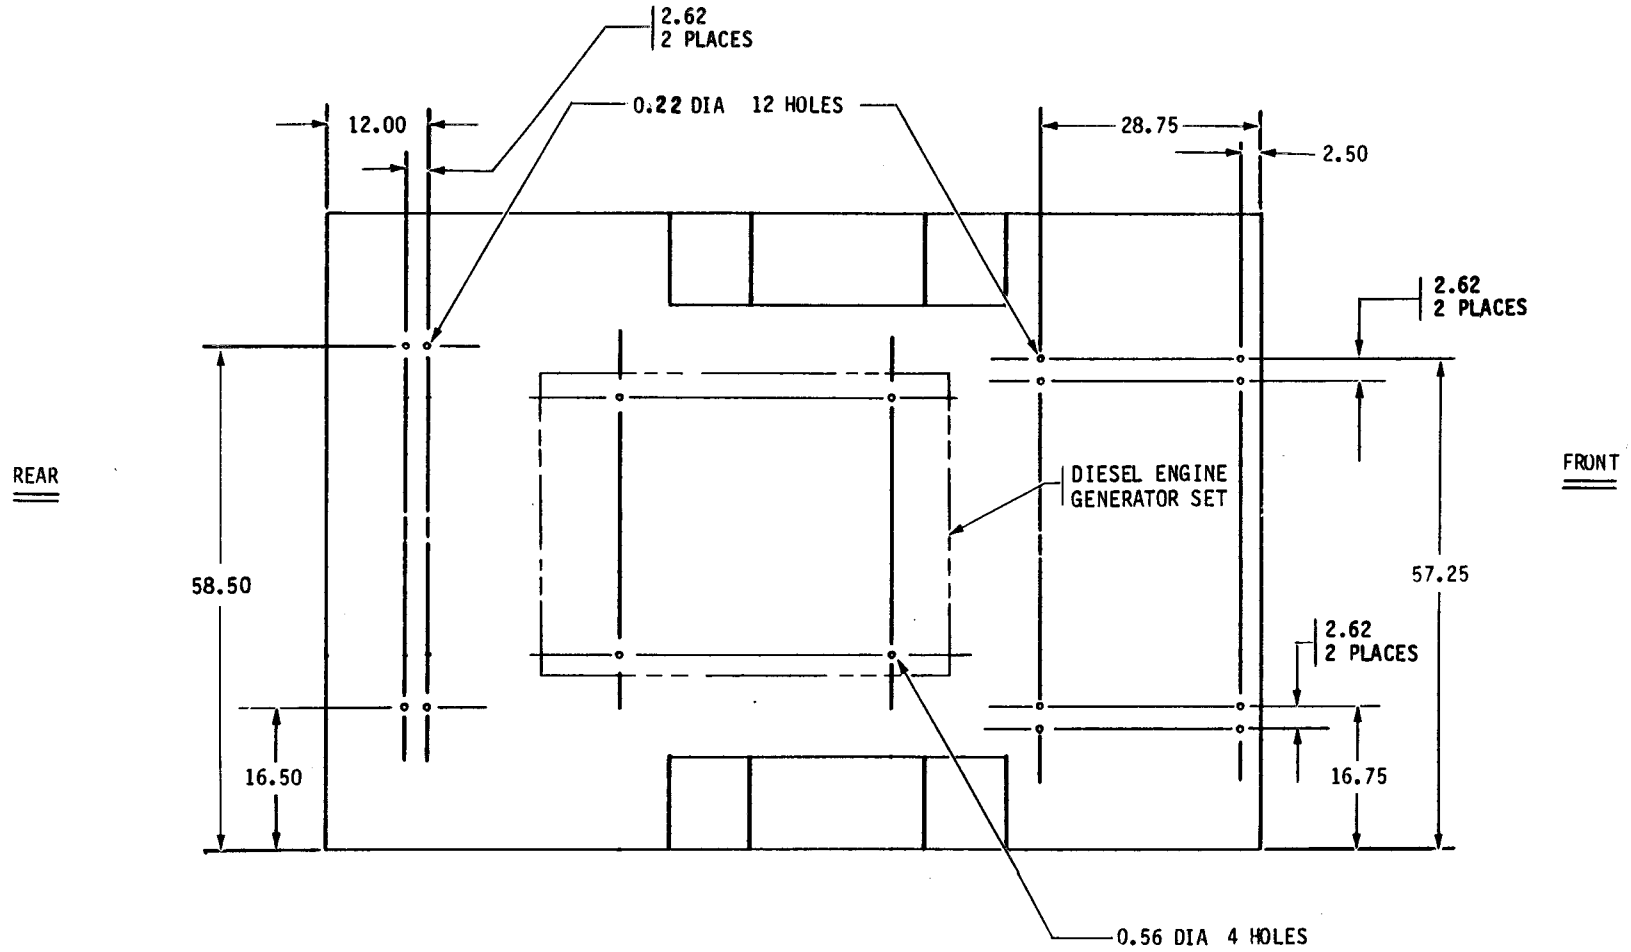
Hole dimensions for floor mounted equipment, unit 3, M105A2.
